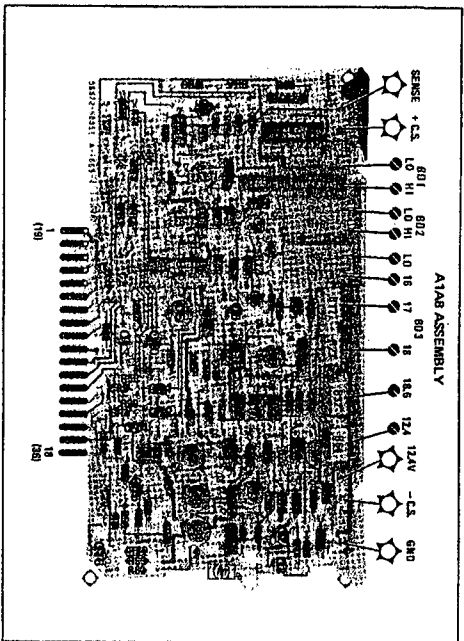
A1A8 TTM Driver Assembly Component, Adjustment, and Test Point Locations
